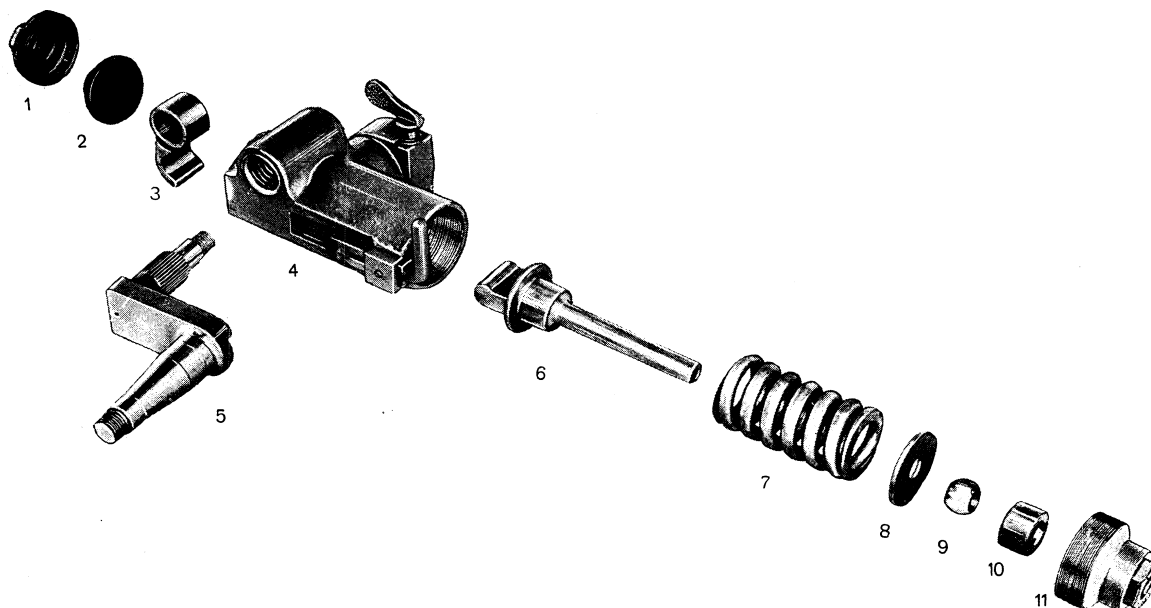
SPRING DEVICE WITH HELICAL SPRING — DISMANTLED (for weapons B1A2, B1A3 and B1A4)
